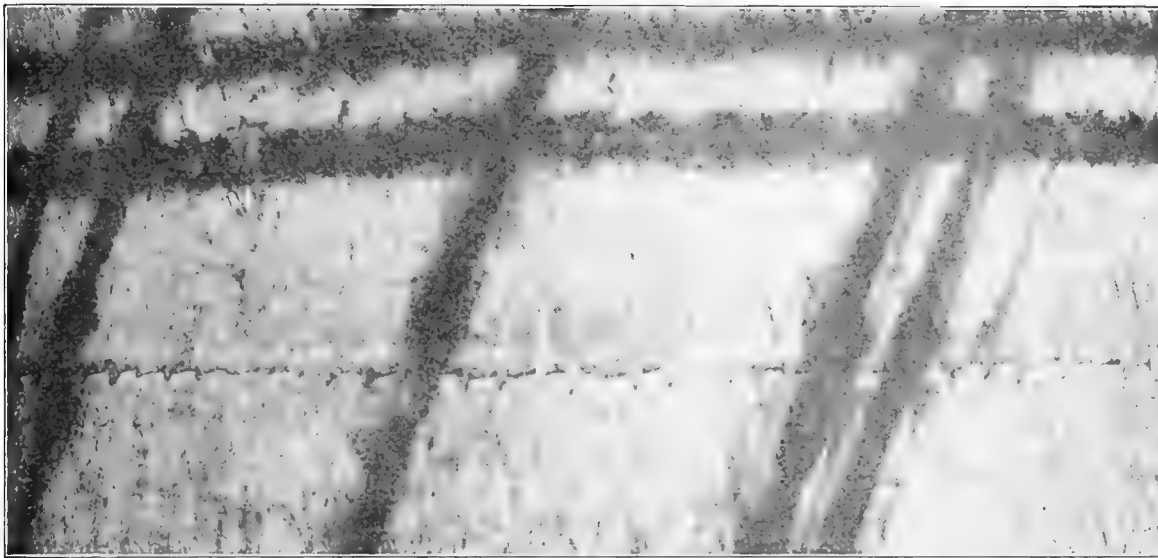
UPPER SIDE OF SEAM SHOWN IN FIG. 59.
